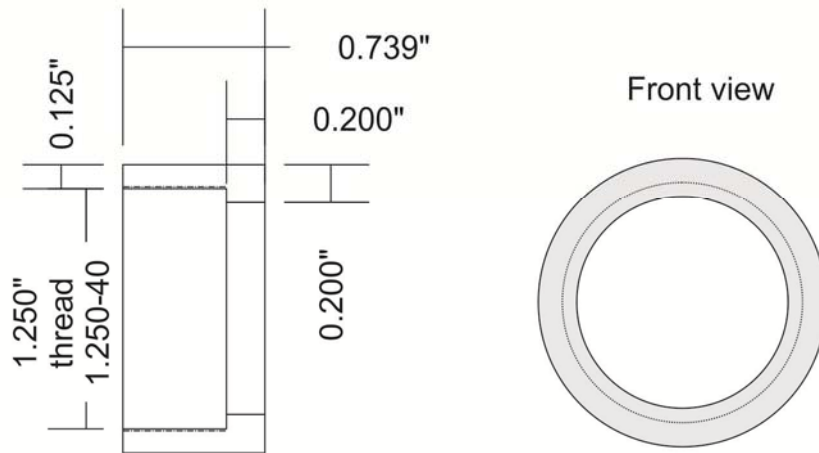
Ferrule positioning assembly adjustment ring. The adjustment ring threads over the adjustment plate and it moves the collet holder in and out when being turned. The collet holder is fixed to the adjustment ring by a rim on the collet holder itself and by three screws with Teflon washers in the back (cf. Figure 8.2).
